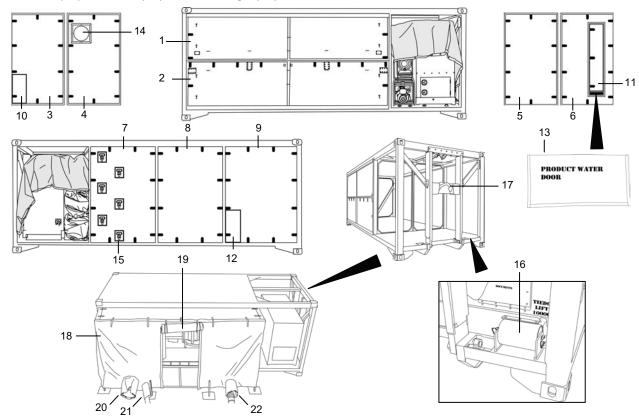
A-TWPS Flat Rack and Fabric Wall.
